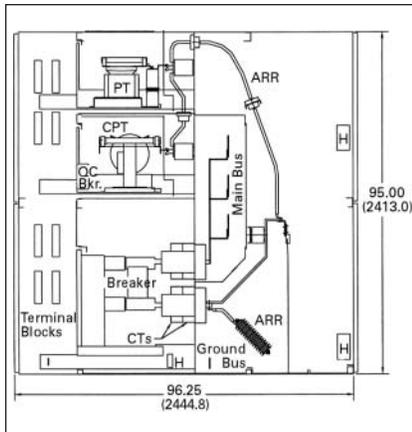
5/15 kV Switchgear Outdoor Common Aisle Base Plan (Typical Details)—Dimensions in Inches (mm)
